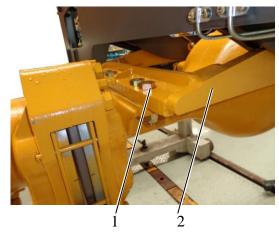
1 Connecting bolt 2 Auxiliary frame
